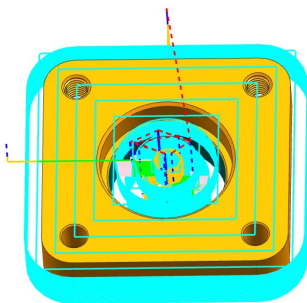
Rough machined the reverse side features of the bearing pedestal
